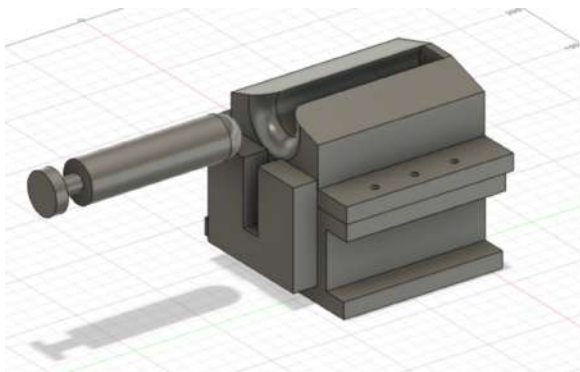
Conical Clutch Design Lock Isometric View (Opened Configuration).
